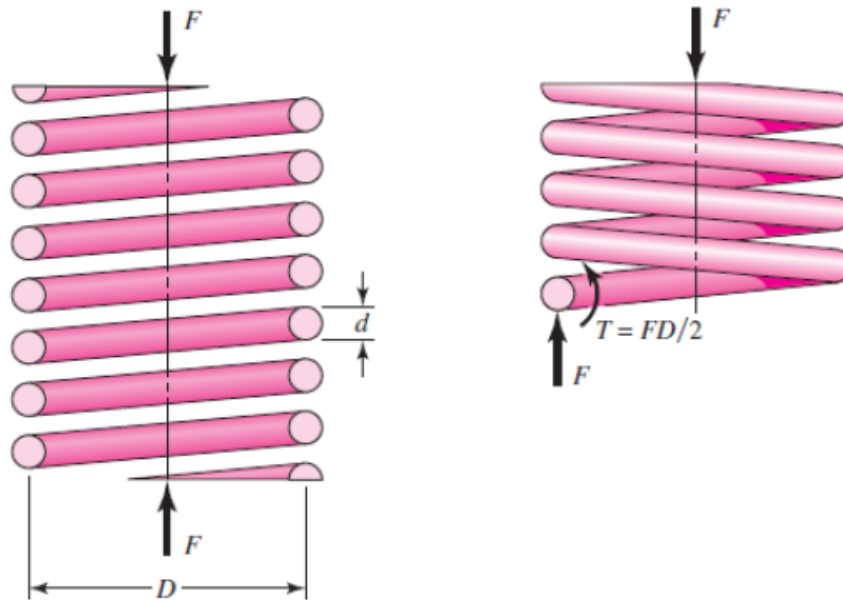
Helical Spring loaded axial [ML⁺13]
